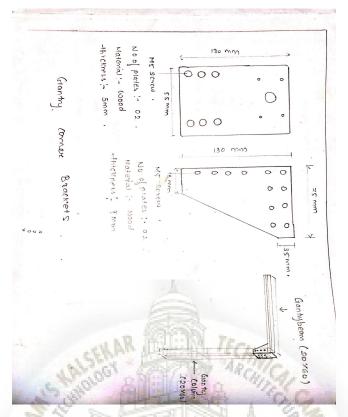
Detail Sketch of Gantry Corner Brackets
